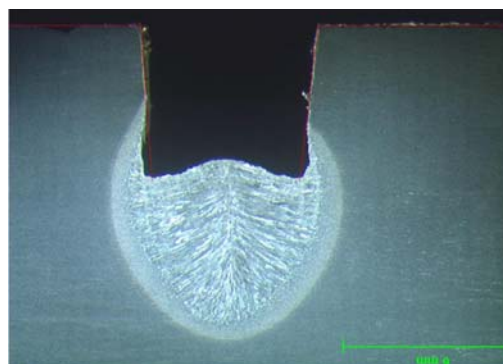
Macro of weld “Run 20” in the Overhead position with the location and shape of the groove walls.
